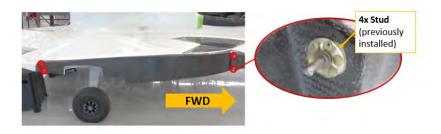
SEAWINGS™ TIP INSTALLATION
